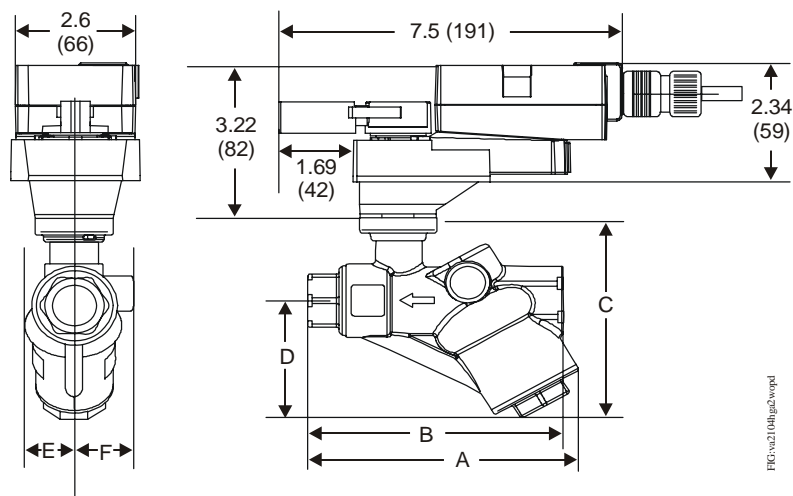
VA2104-HGA-2 Actuated P1000 Valve without Pressure Taps Dimensions, in. (mm)
